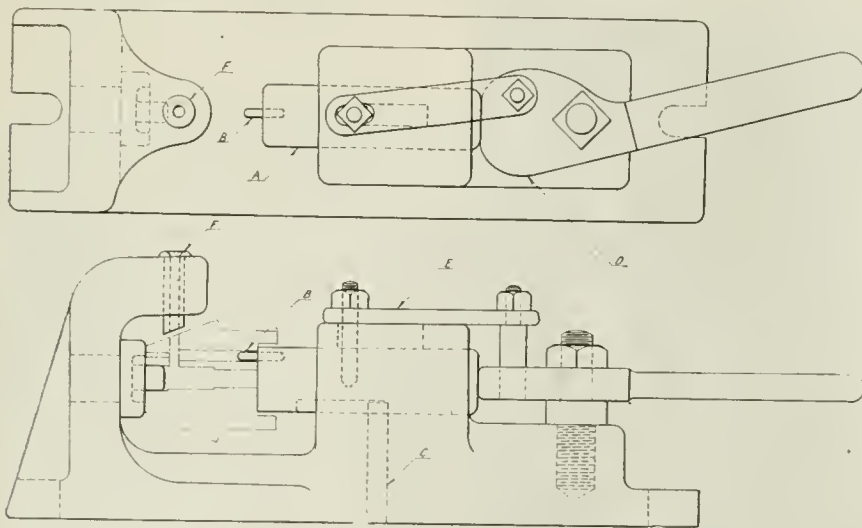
JIG FOR DRILLING CENTRIFUGAL BOLT HOLE.
